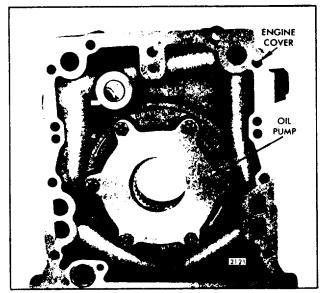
Typical Right-Hand rotation Lubricating Oil
